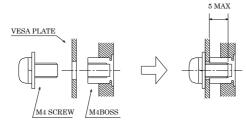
Physical Dimensions (PT-955LXC-DC5311)
